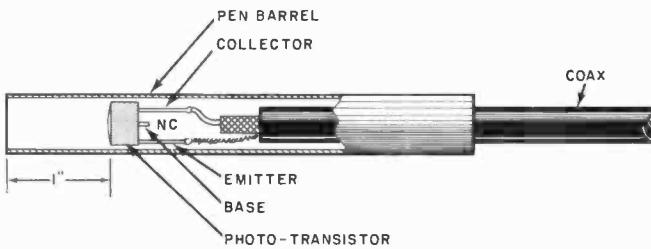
To make probe, phototransistor is mounted in an old pen barrel and connected to a coaxial cable.
